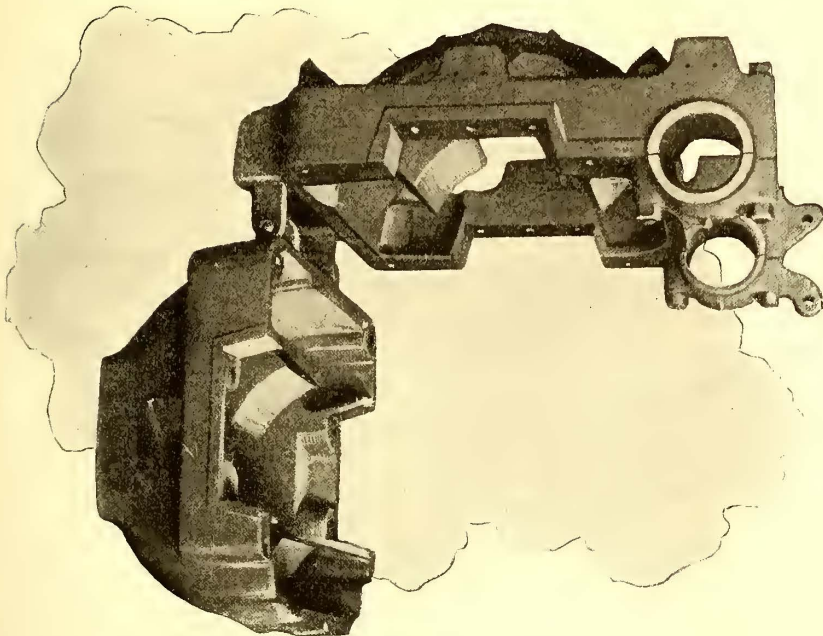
SINGLE REDUCTION MOTOR CASTINGS.
